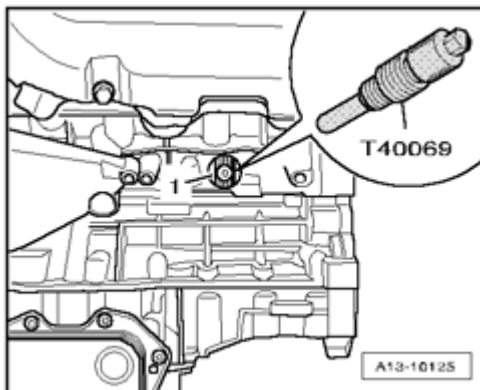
Installing Crankshaft Holder T40069 Into Hole
